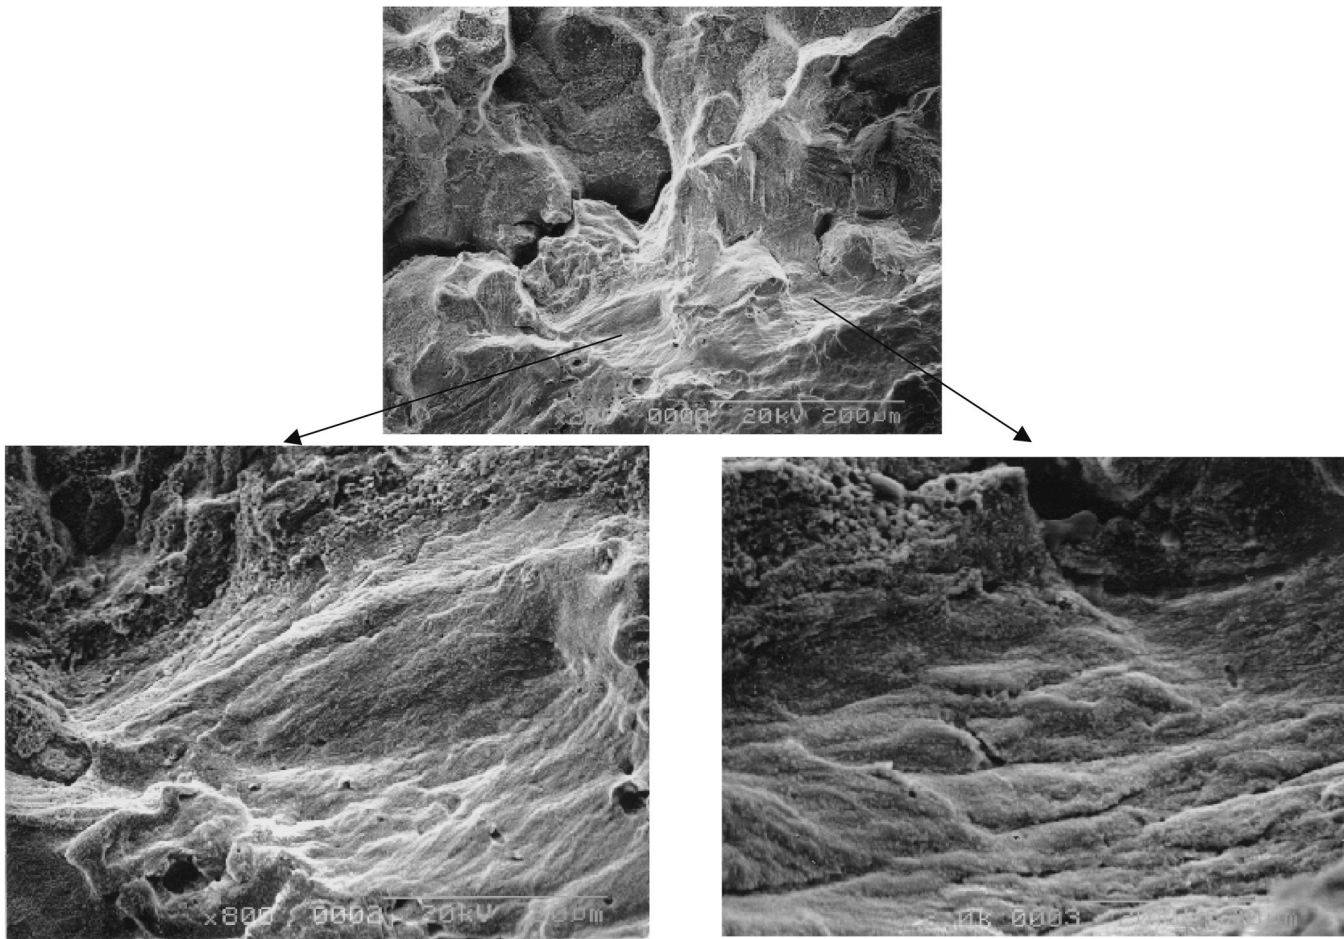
Fractographs of the mold crack near the crack root showing the striation structure.
